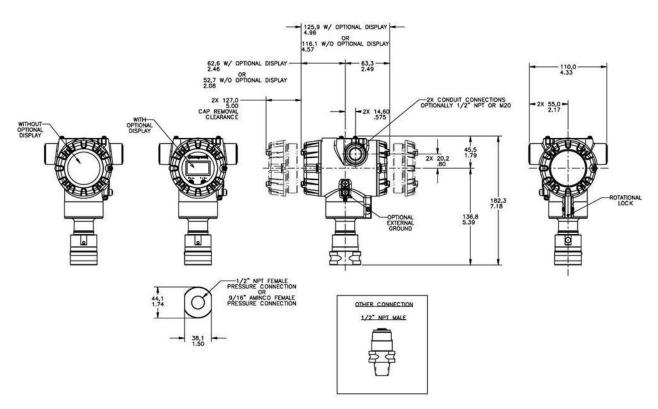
Typical mounting dimensions of STA72S, STA74S, & STA77S for reference
